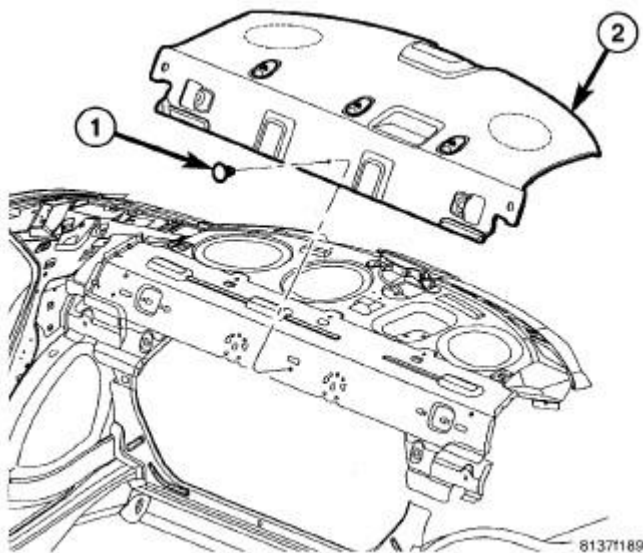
Removing/Installing Rear Shelf Trim Panel
